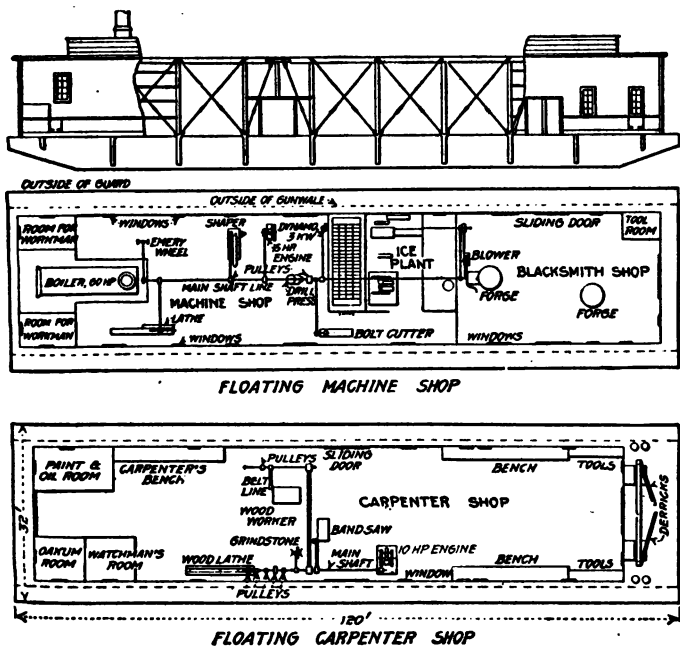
Layout of Two Federal Shop Boats — Machine and Carpenter.
